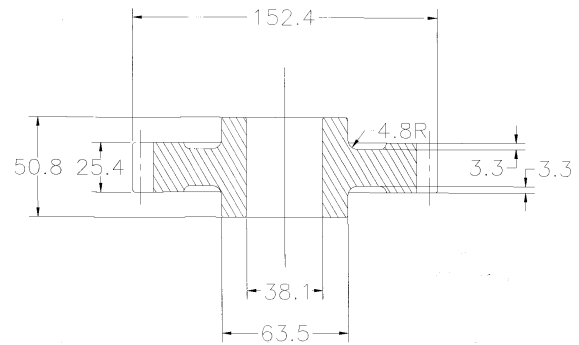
SAE Six-Pitch test gear dimensions (in mm). 143.9 mm pitch diameter is indicated.
